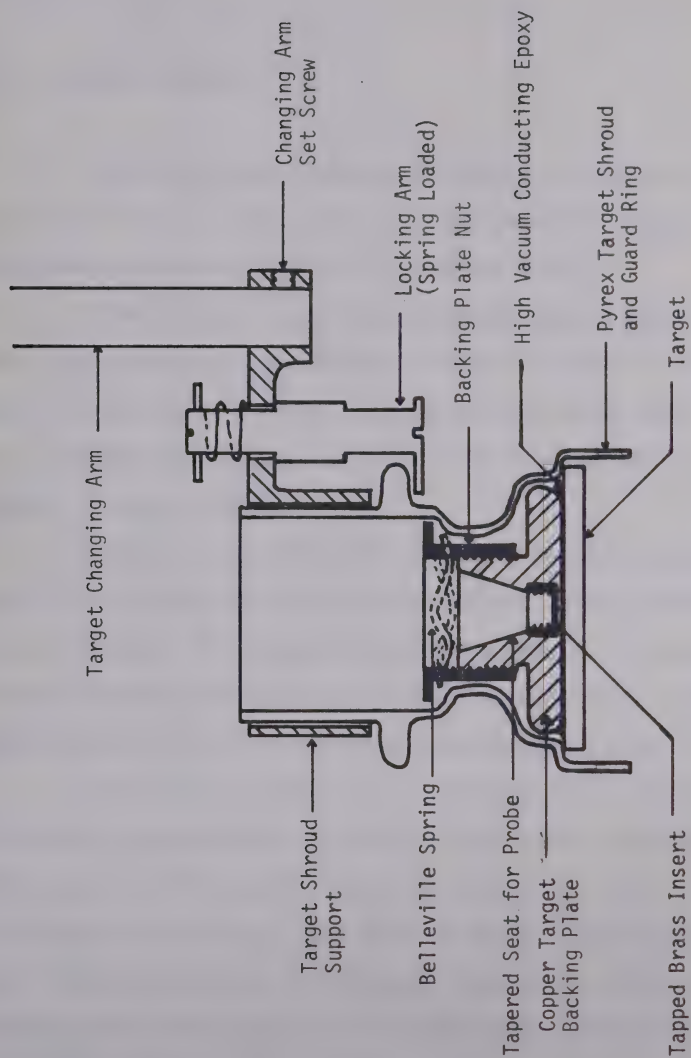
Cross-Section of Changing Arm Assembly.
